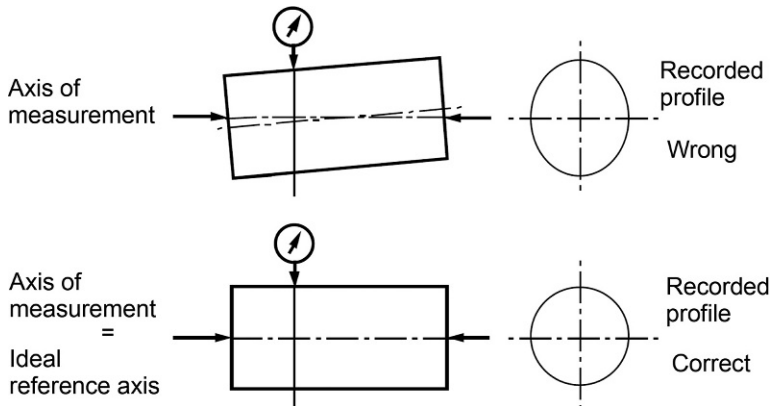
Roundness measurement: false measurement caused by a plane of measurement not perpendicular to the ideal reference axis
